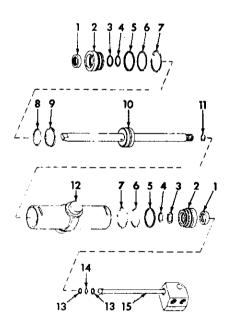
Exploded view of double acting steering cylinder used on Series 424, 444, 2424 and 2444 equipped with narrow tread front axie.
